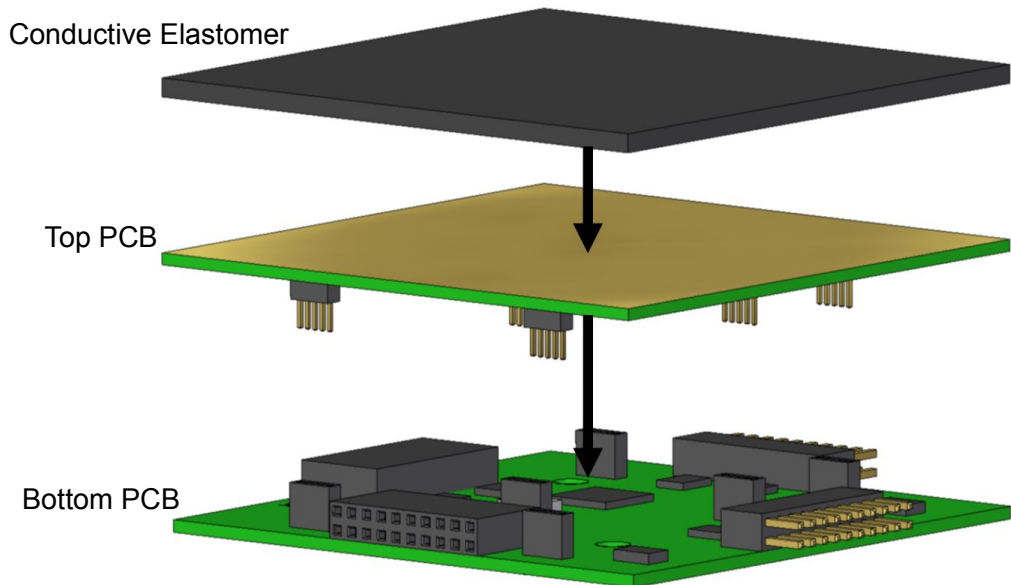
Schematic of a single sensor module: The 80x80mm bottom PCB contains control and power circuits, the top PCB contains the electrode surface and analog circuits to measure the tactile cells. The top PCB is of the same size as the bottom PCB and gets covered with a conductive elastomer.
